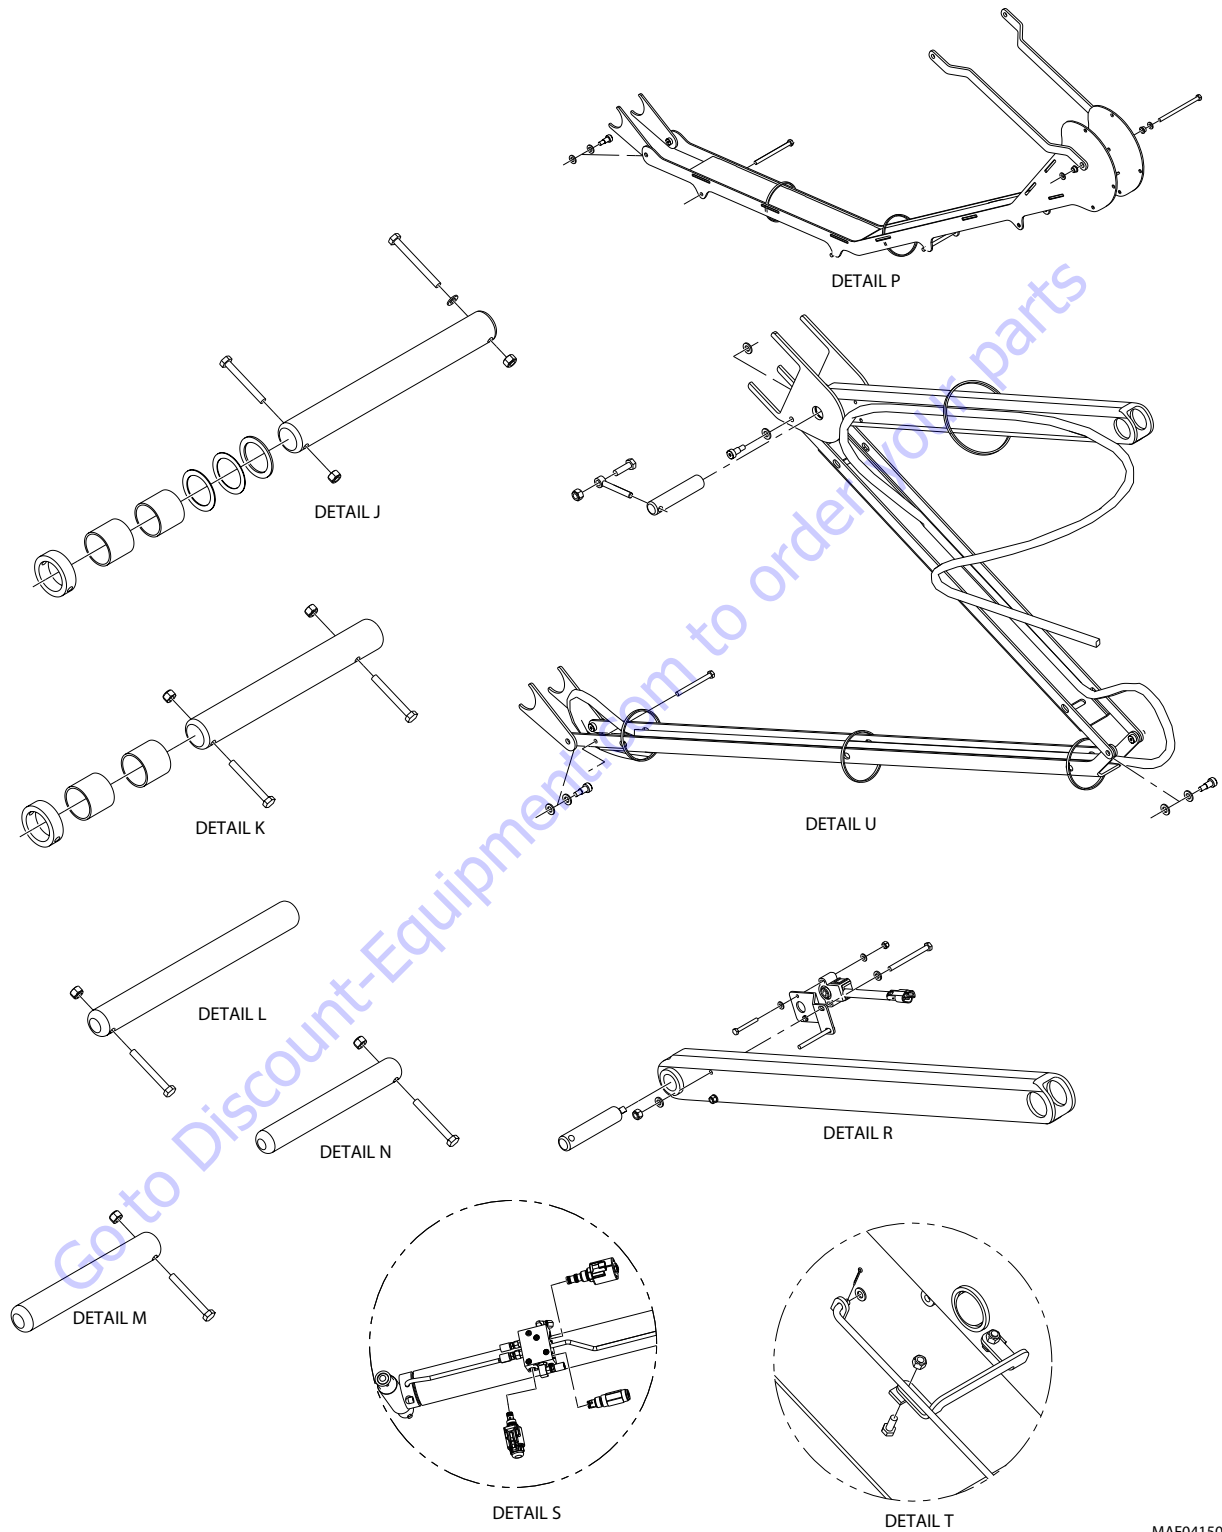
Scissor Arm - Hose and Wiring Routing
